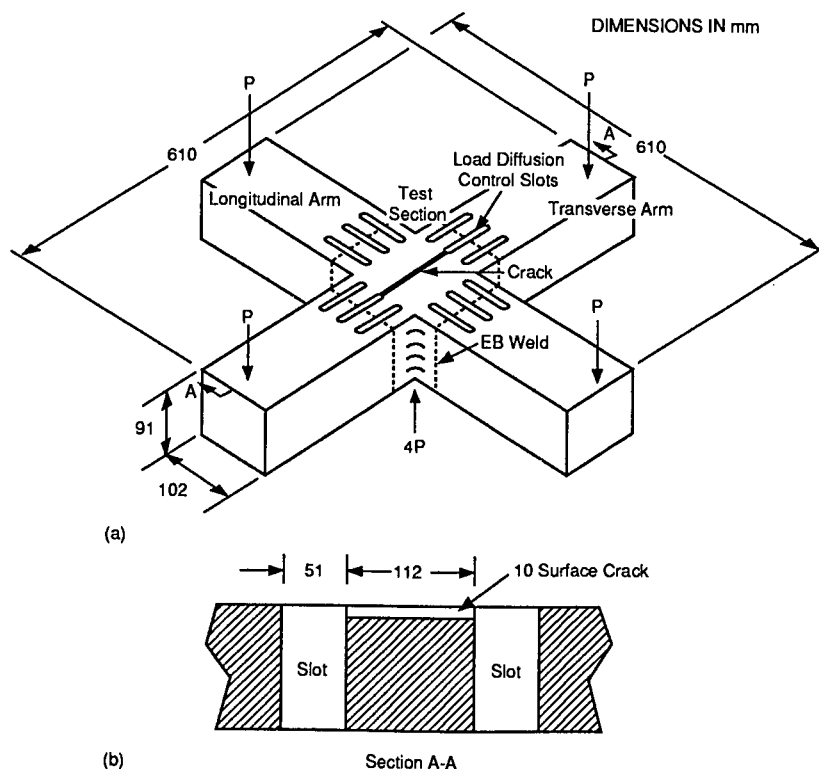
Cruciform bend specimen used in HSST biaxial testing program: (a) dimensions of cruciform specimen and (b) details of crack plane.
